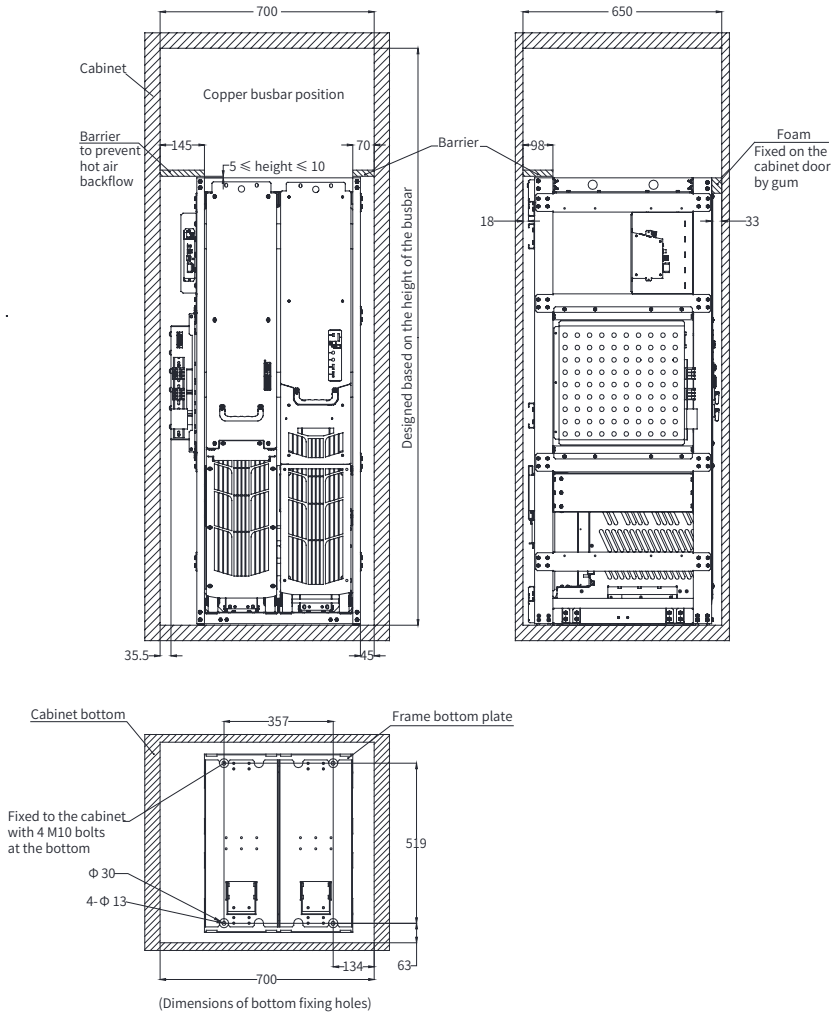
Minimum requirement on cabinet dimensions (mm)
